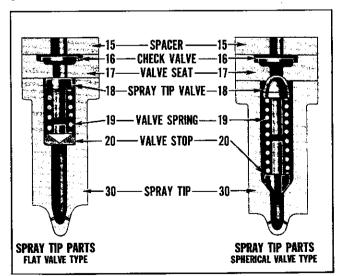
Comparison of Spherical with Flat Valve in Spray Tip Assembly.
